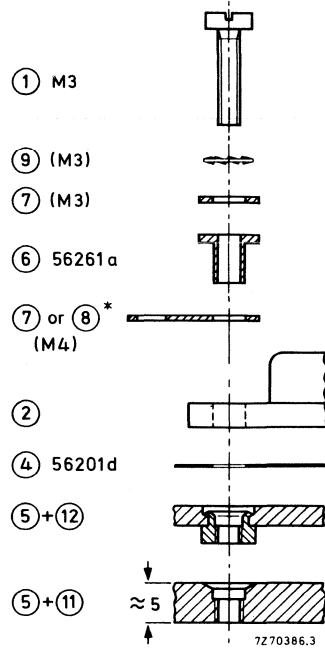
Insulated mounting (500 V) with tapped holes or insert nuts.
